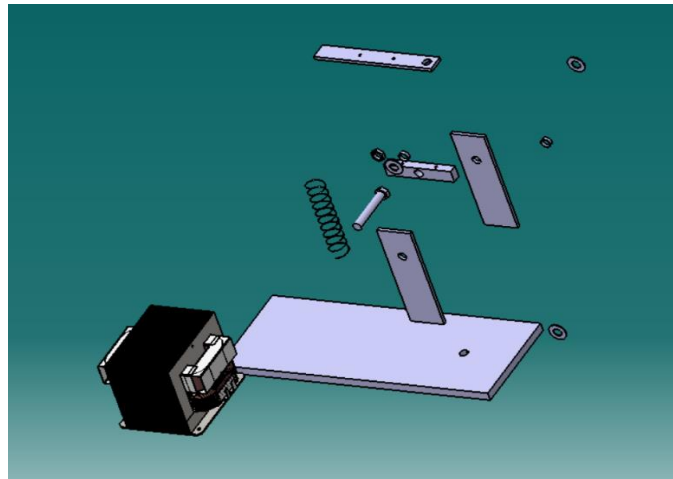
Exploded View Of The Spot Welding Machine
